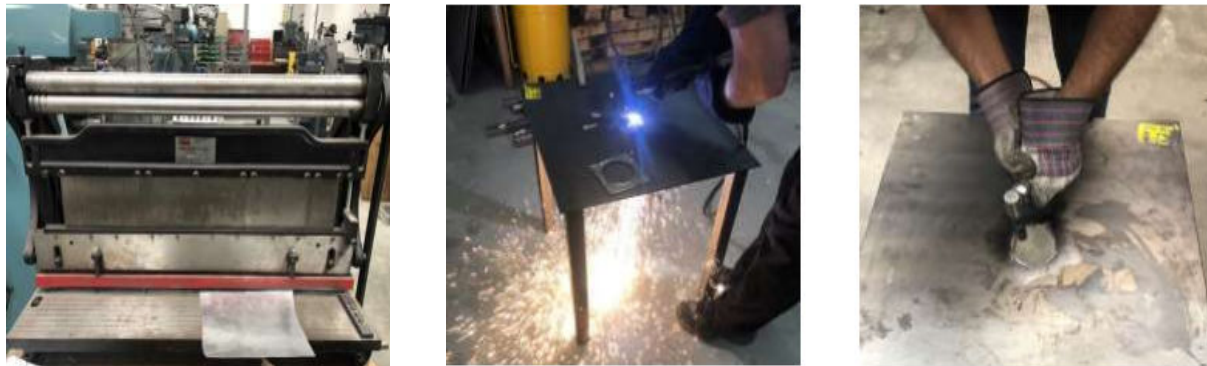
Stages of the manufacturing process: sheet rolling the circular enclosure (a); plasma cutting top plate (b); removing of the jagged edges of top plate (c)
